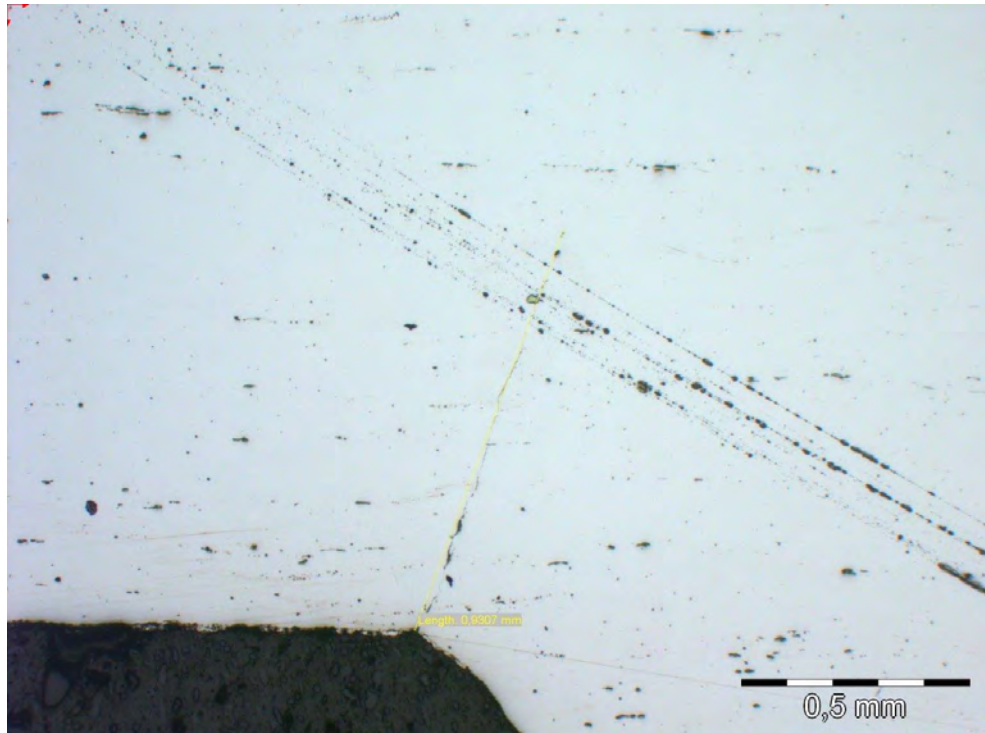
Crack at segment B, first ridge on barrel no. 8832/6713
